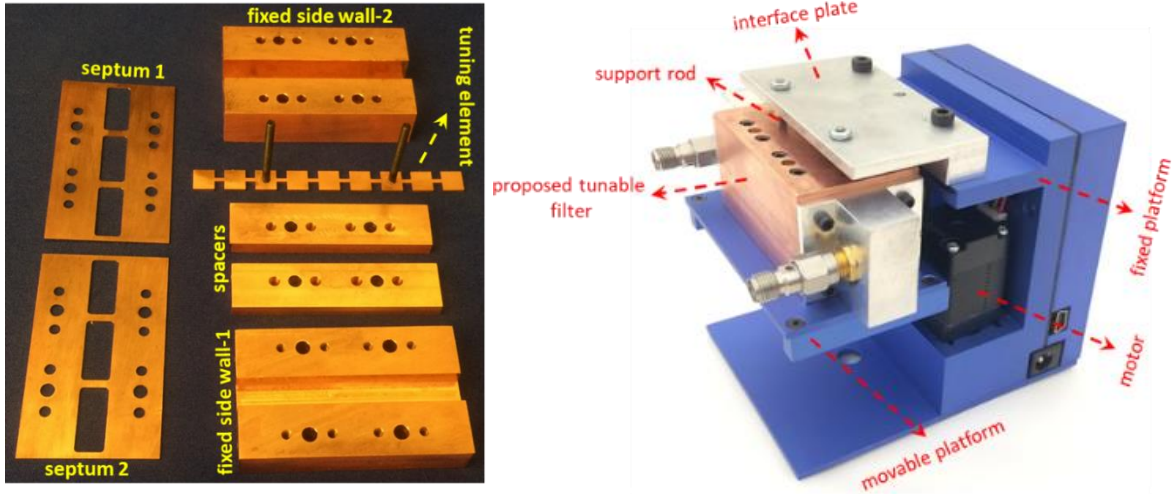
Fabricated Prototype Unit (a) Dis-assembled, (b) Tunable Filter with Tuning Station
